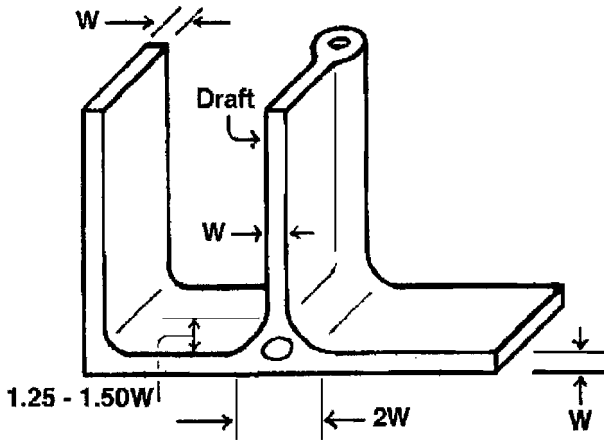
Gas-assisted injection molding rib and boss design guidelines.
